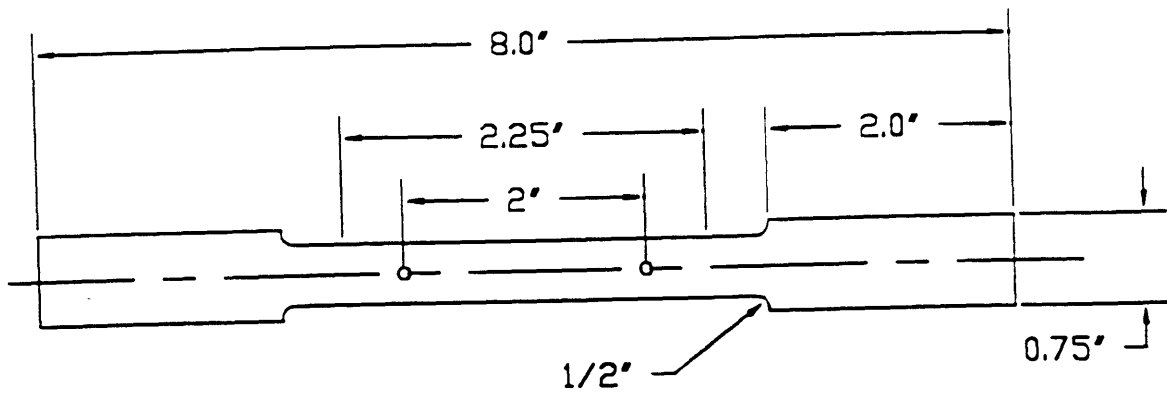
ASTM A370 Flat Tensile Specimen
